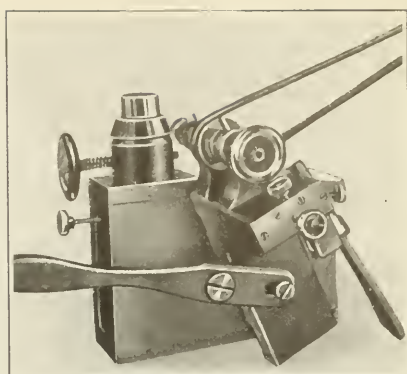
Machine and Fixture used to mark Lighting Line on Fuse Rings
